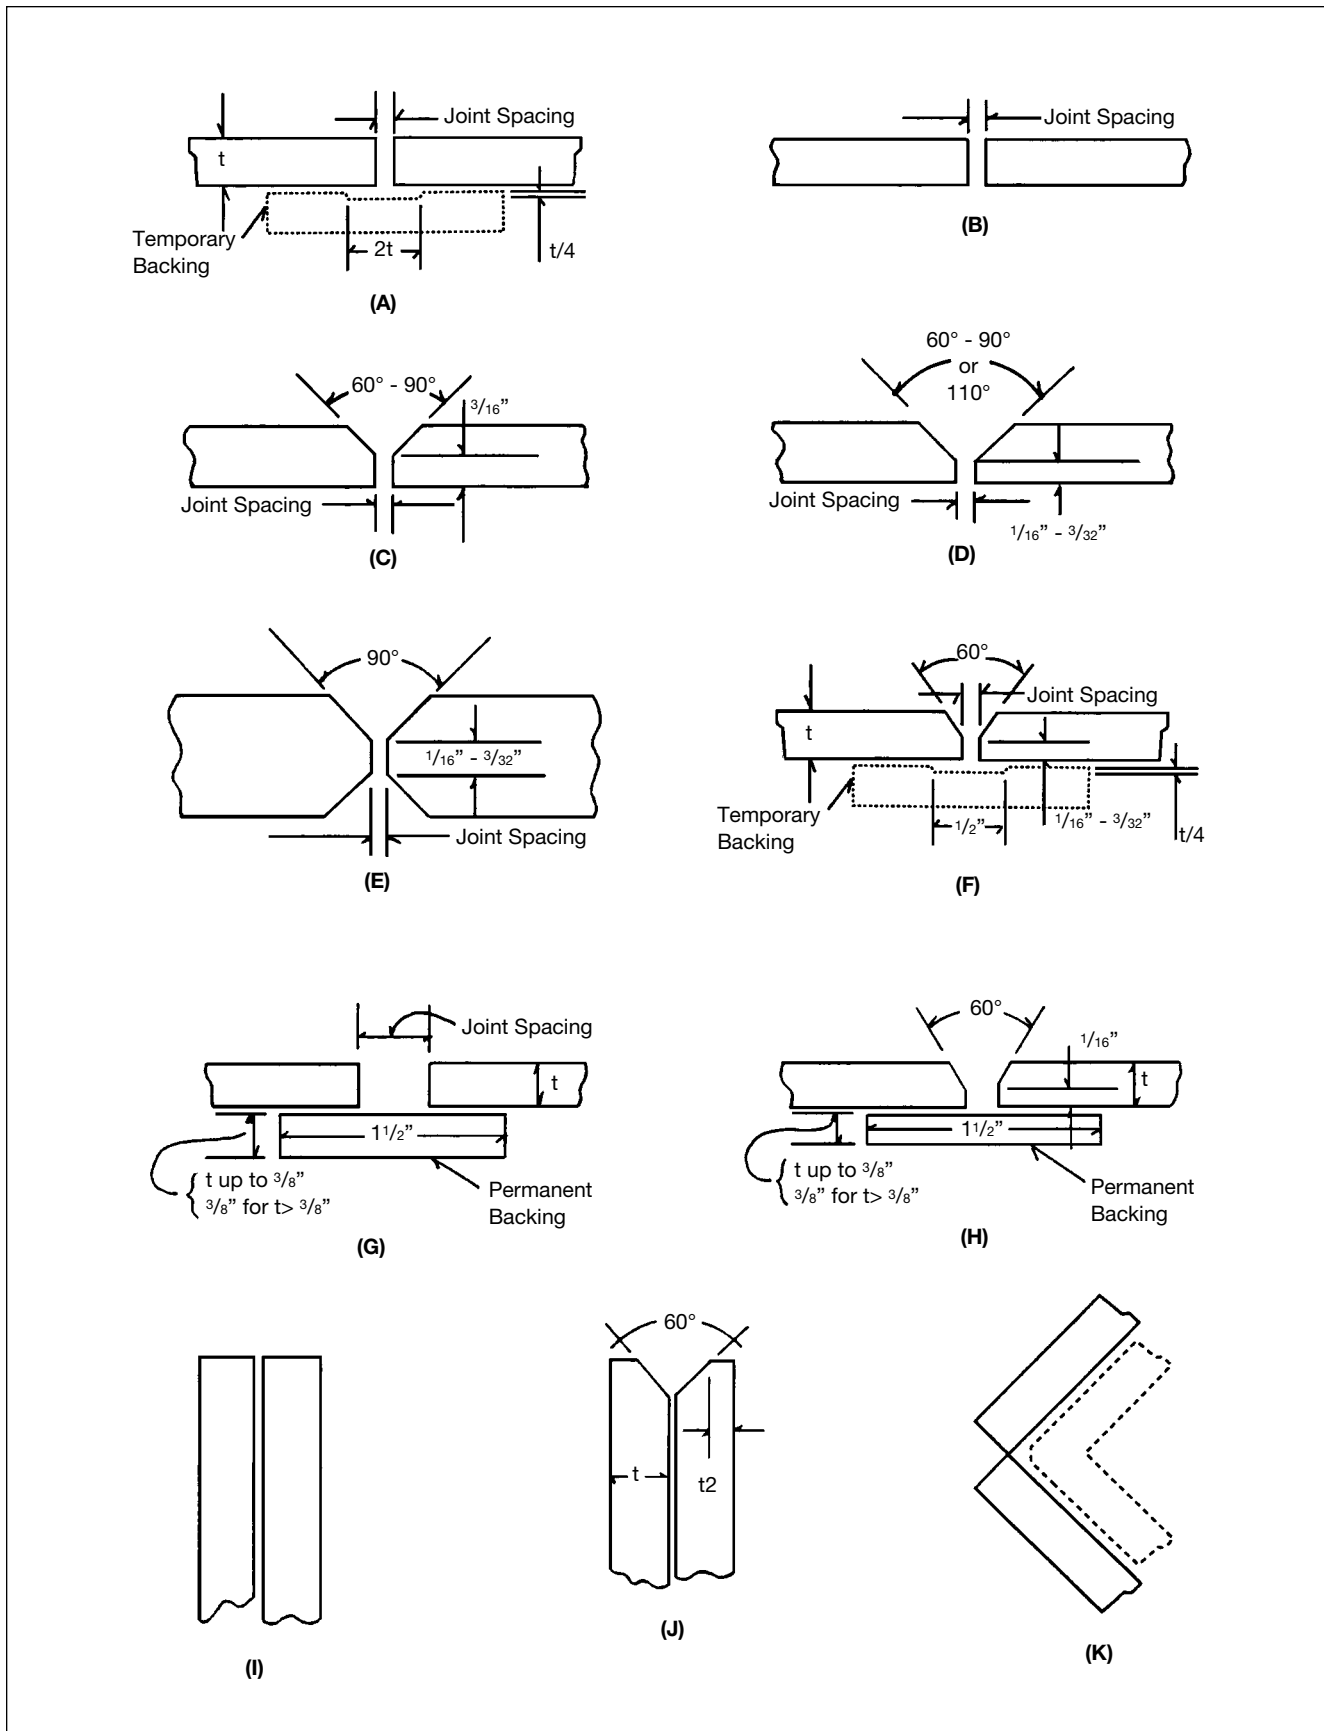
Typical Joint Geometries for Semiautomatic MIG Welding Aluminum.
